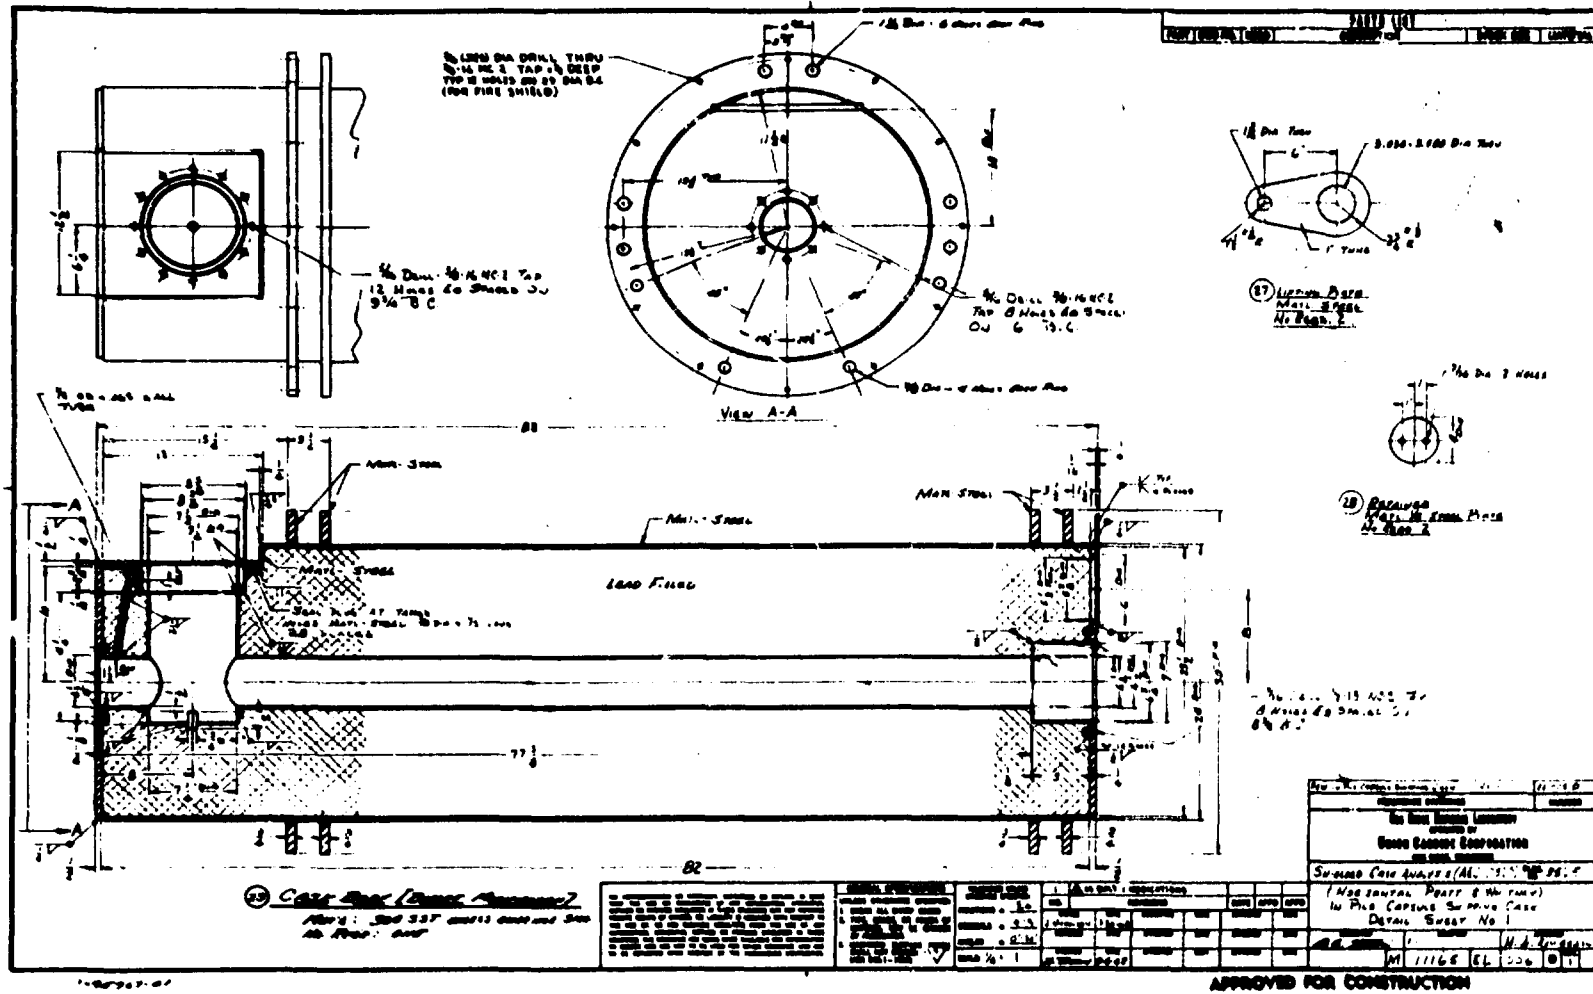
Horizontal Pratt & Whitney in-pile capsule shipping cask, detail.
